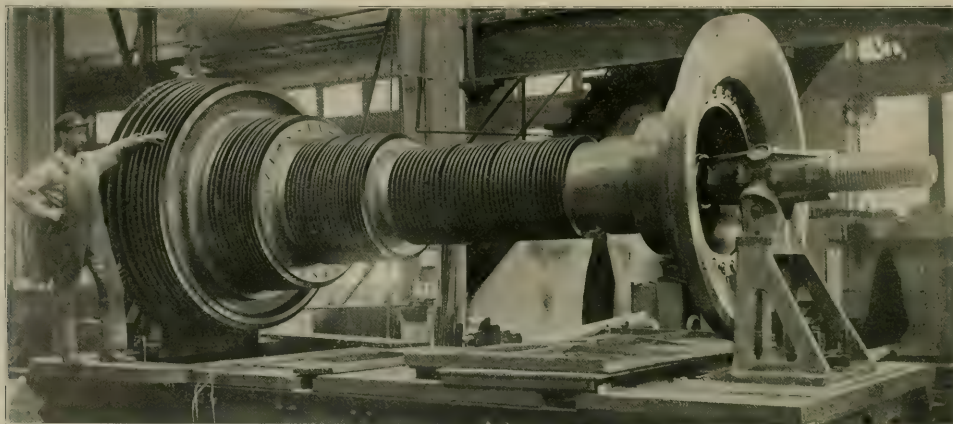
REVOLVING PARTS OF A 3,000-H. P. TURBINE.
